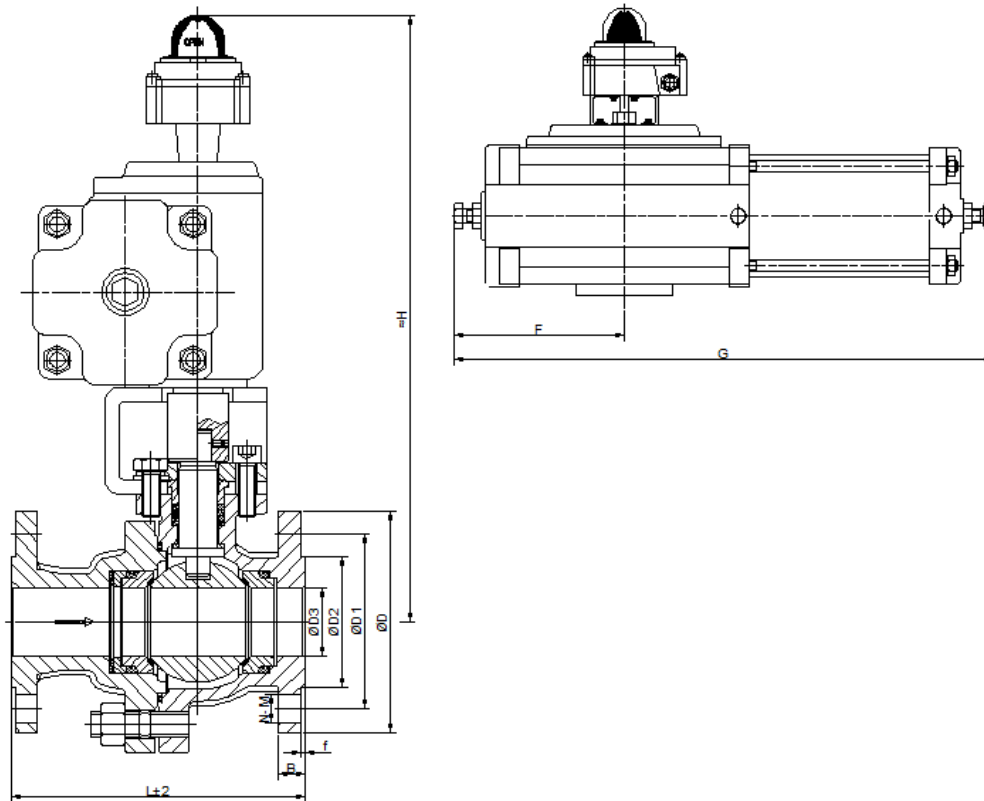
Dimensions of Linor floating ball valve with high temperature seat double-acting, PN40, flanged, sizes DN15-100
